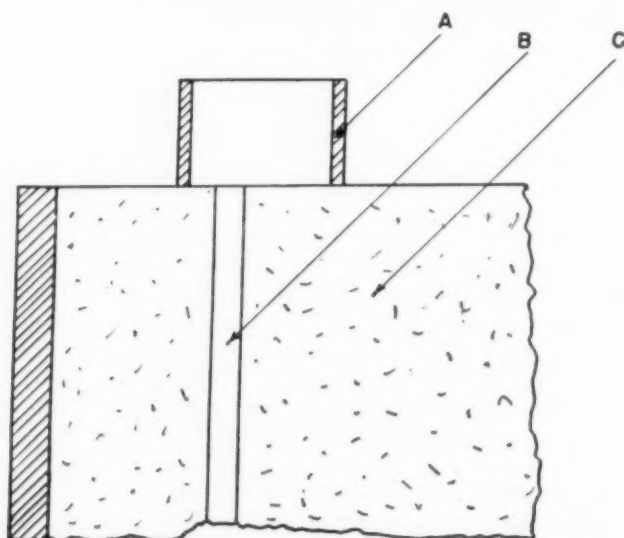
Conventional sprue system. (A), pouring basin; (B), sprue, and (C), mold material.
